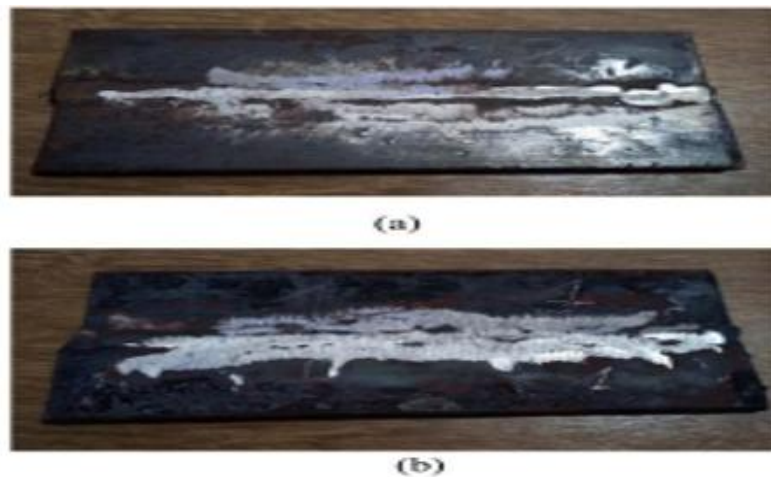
Hardness test specimen (a) as welded and (b) heat treated samples
